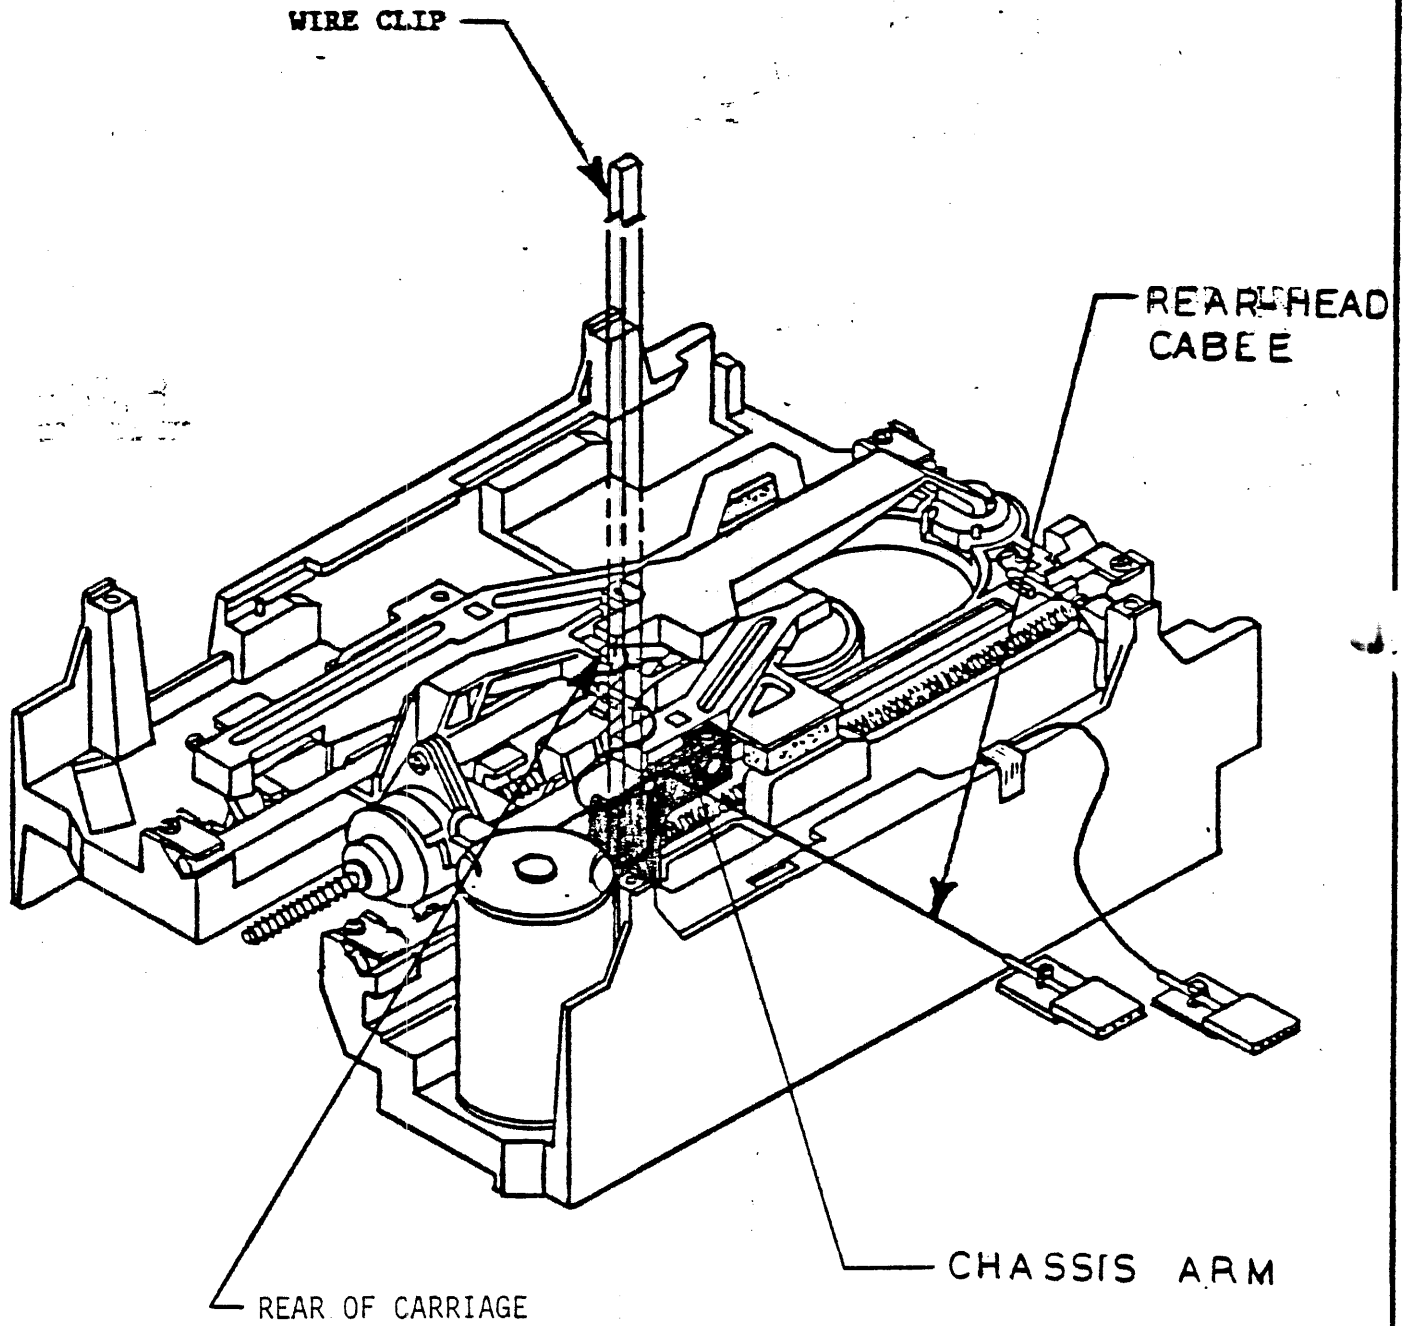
THE REAR HEAD CABLE PLACEMENT
